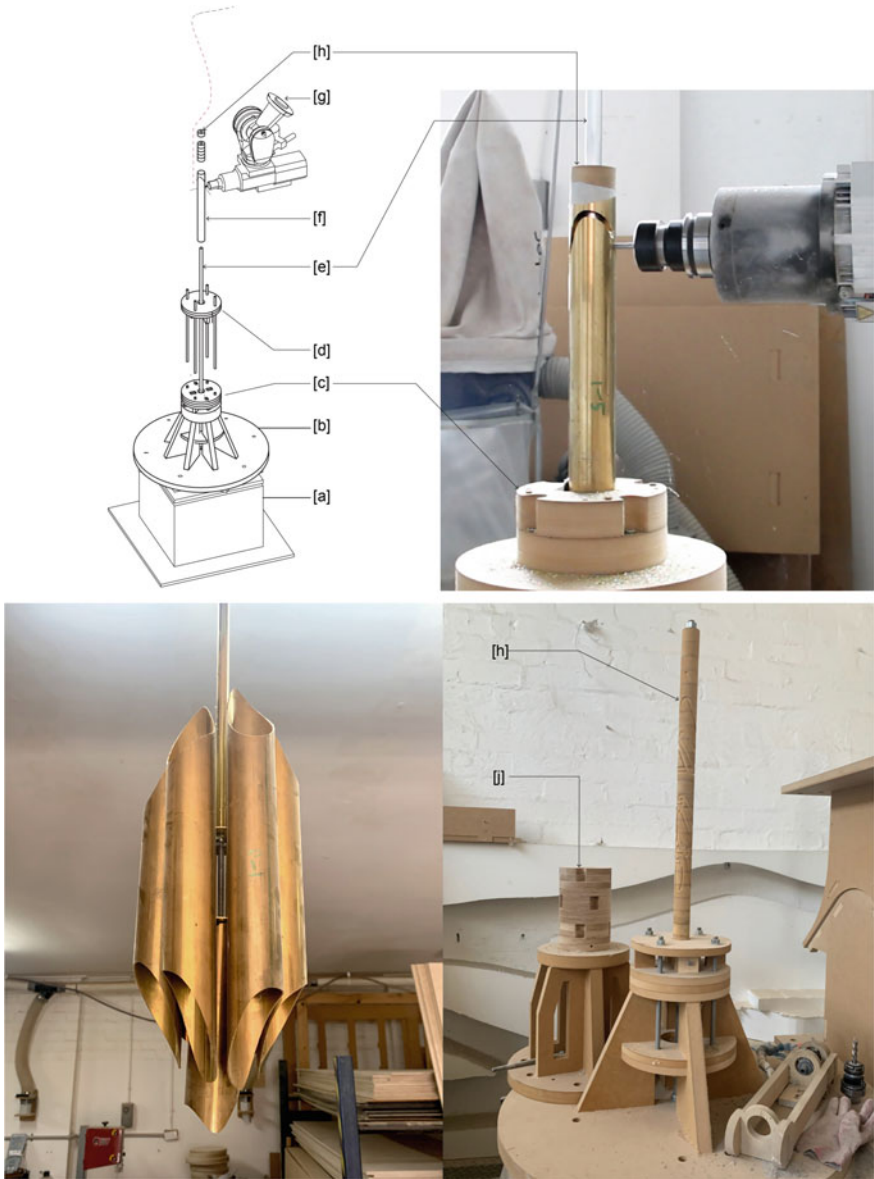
Top left: Design of the fixture holding the metal tube. Top right: Milling of the brass tube using the fixture. Bottom left: 8-tubes chandelier prototype. Bottom right: Robot fixtures indicating the solid MDF block [h] infill to the brass tube and early fixture prototype [j].
